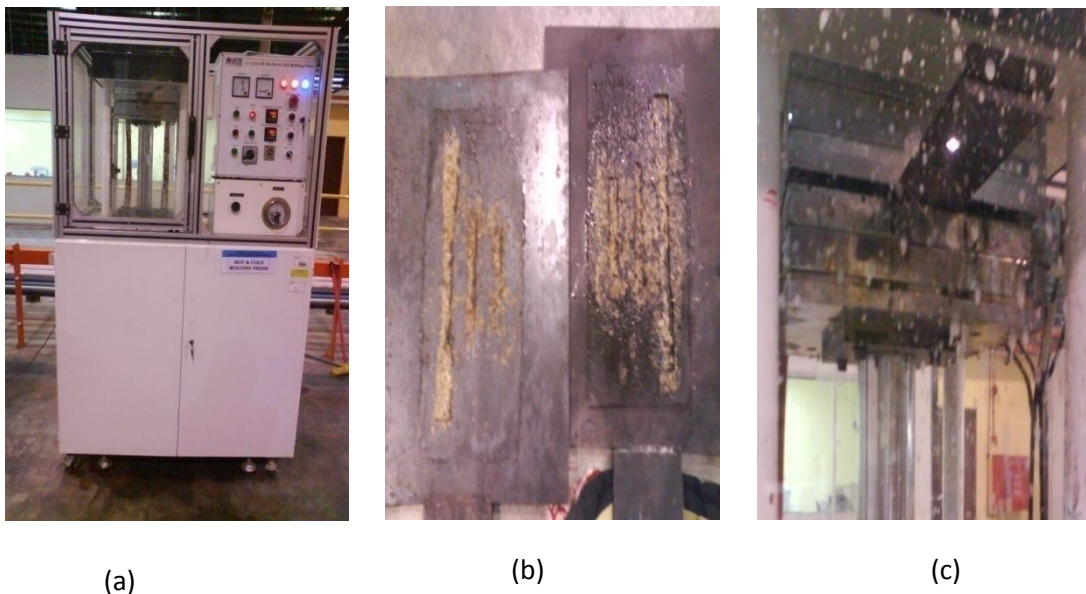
Compression molding process; (a) hot press equipment, (b) mold used and (c) hydraulic press
